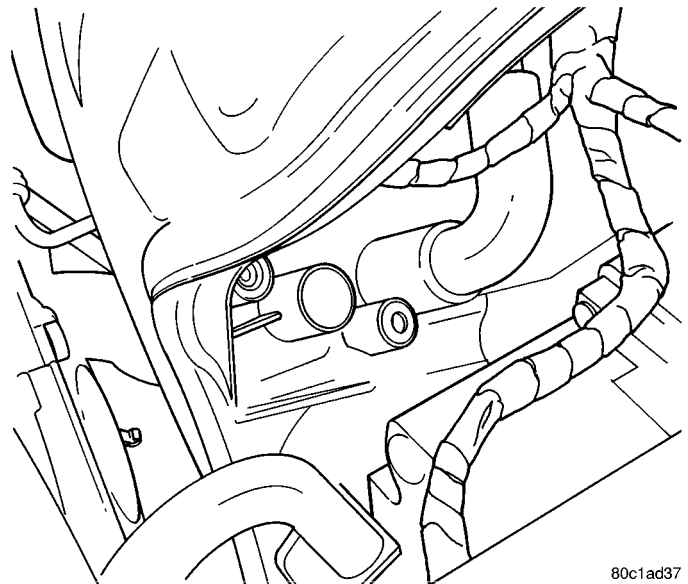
INTAKE MANIFOLD/MAP SENSOR LOCATION
